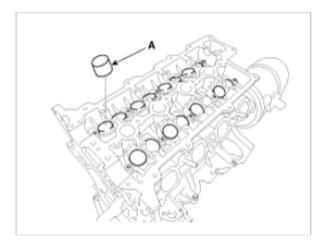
Identifying Mechanical Lash Adjuster Courtesy of HYUNDAI MOTOR AMERICA
